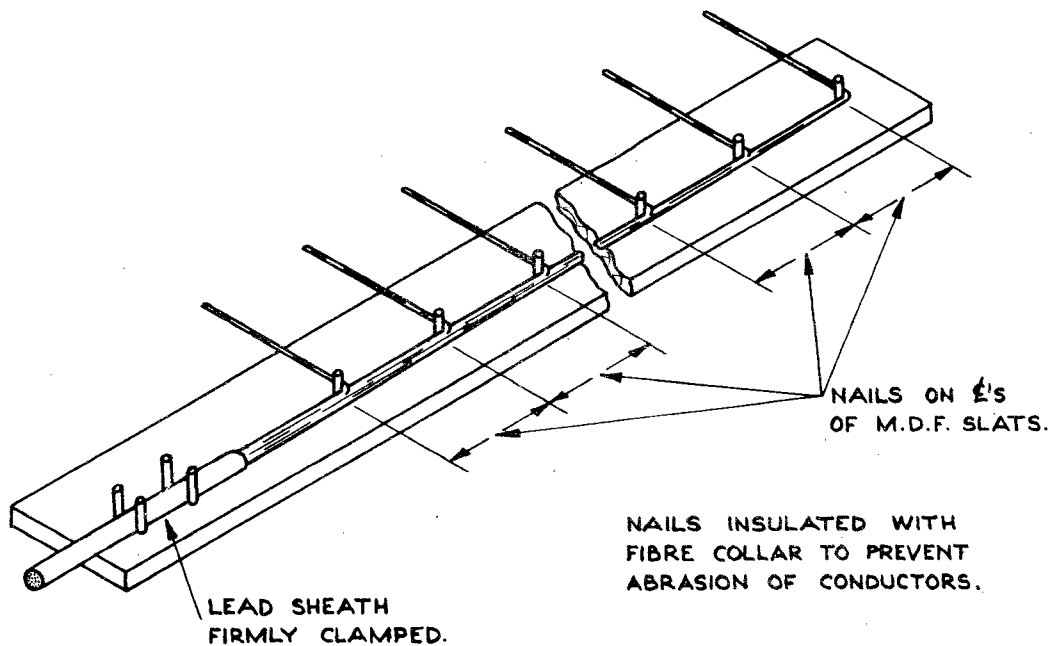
TYPICAL CLASS 1 FORMING BOARD.
